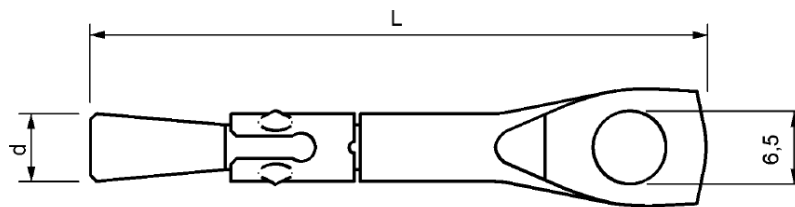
TT-THROUGH BOLT steel expansion fasteners dimensions, version TWH
